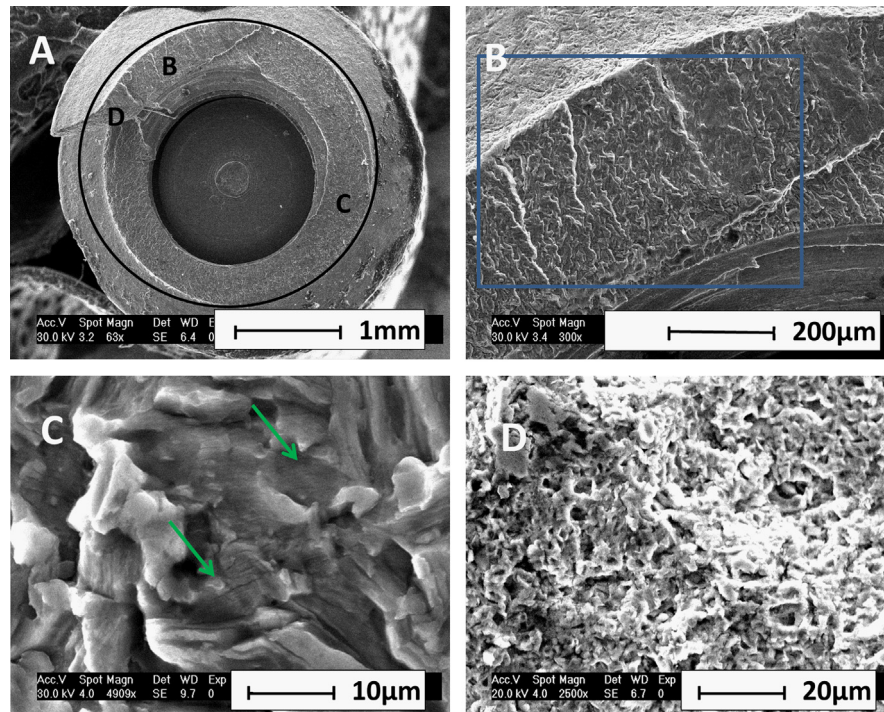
Failure analysis of retrieved fractured CP-Ti dental implants with representative fractographs A: The fracture surface marked by round circle. The letters on the fracture surface are the locations on the fracture surface of fractographs B, C, and D. B: fractograph of crack initiation location. Parallel line marked by a blue square on the flat part. C: fractograph of fatigue crack propagation: fatigue striations are marked by green arrows on the flat part. D: final failure markings, dimples on the rough part. (For interpretation of the references to color in this figure legend, the reader is referred to the web version of this article).
